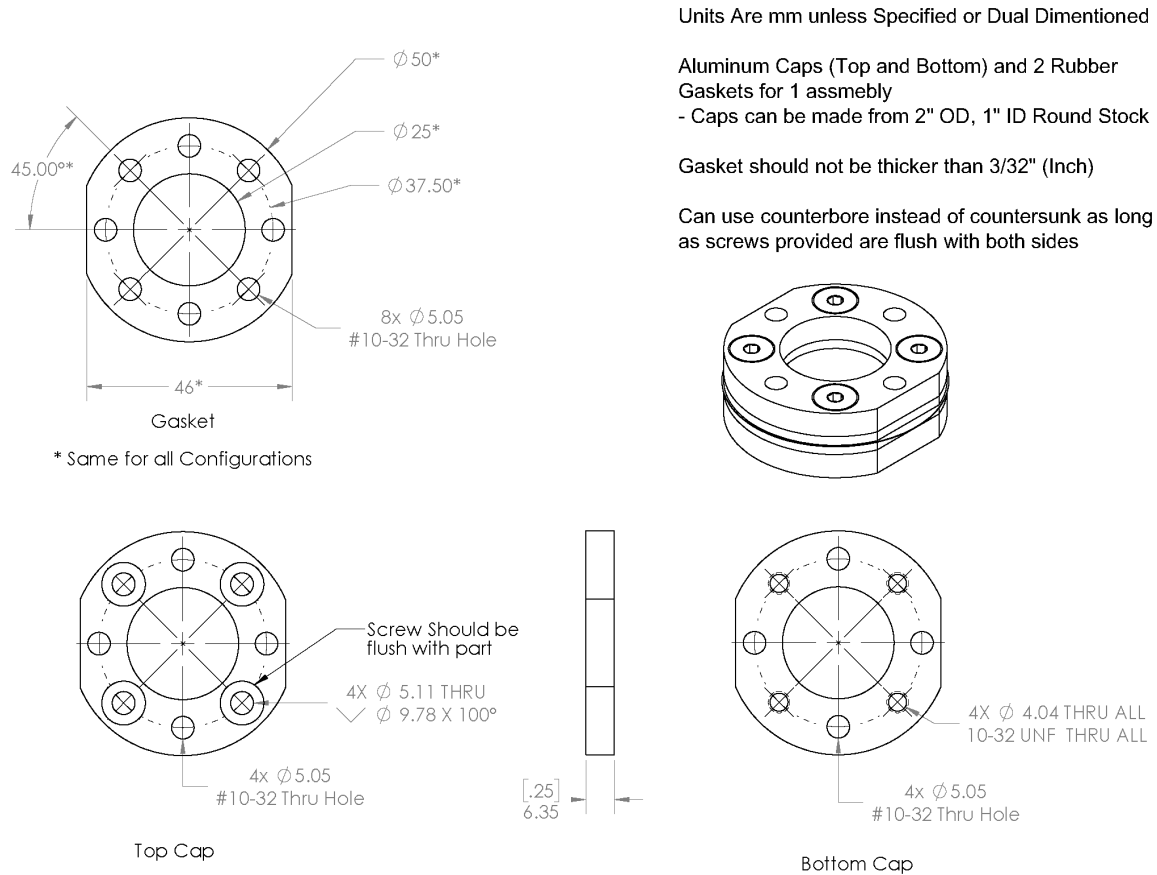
CAD Drawing of the Sandwich Assembly Used in the Puncture Test and Partial Puncture/Dye Test Setup
